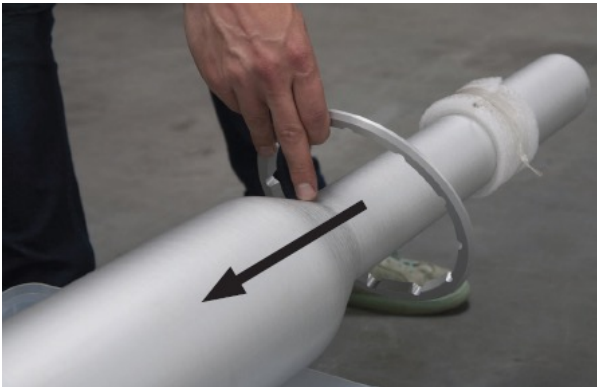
Orient Bottom Adapter Ring with Bumpers Facing Top of Pole
